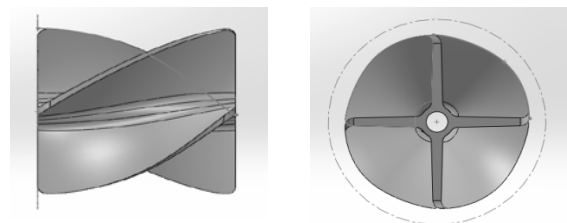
Impellar Model (a) Side view (b) Cross Section view
